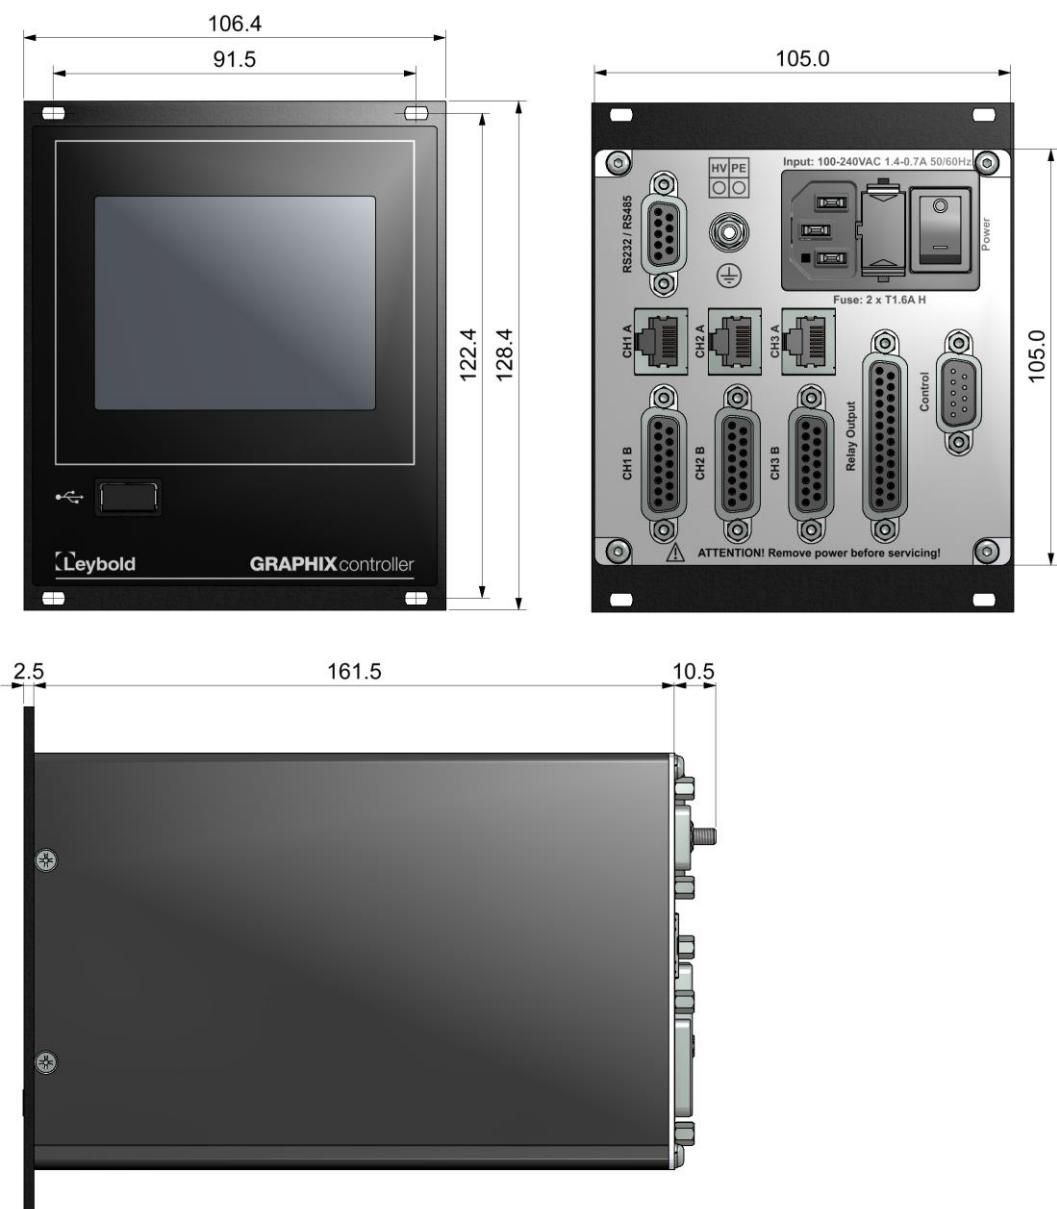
Dimensions of the GRAPHIX controller (in mm)
